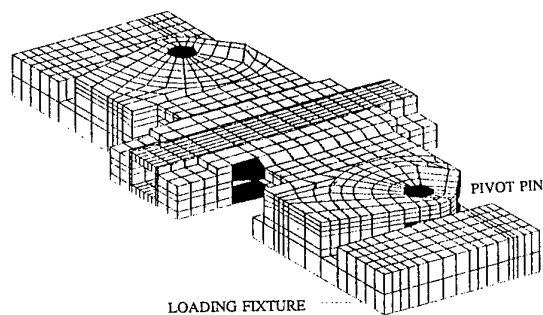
Finite Element Model of F-111 Carry-Thru Fixture.
